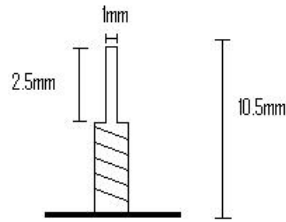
Sketch showing the dimensions of the screw indenter. The salt crystal is held still on top of this indenter with only its tip in contact with the crystal. The screw is then dragged with the bottom aluminium plate that it is attached to, making a scratch on the crystal surface.
